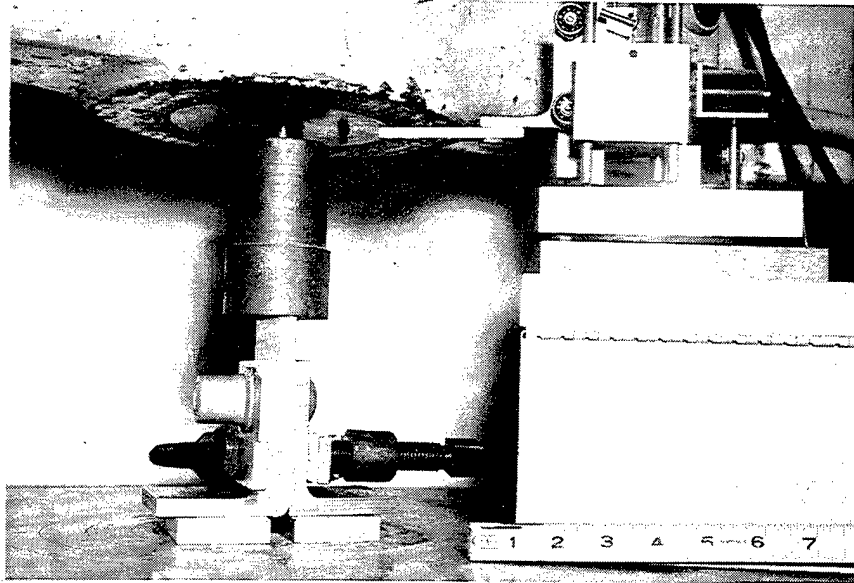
A typical shear test setup of the Huckbolt assembled test Specimen B for double shearing in the pin shank. The specimen was set on 1/2-in-thick blocks to permit the bottom end of the plunger (center piece) to extend beyond the bottom of the angle horizontal legs. A deflectometer was placed in position on the testing machine to measure the movement of the machine table to obtain the load-deflection curve. A clamp was used below the fastener to prevent the spreading of the angle vertical legs at the bottom during the test.
